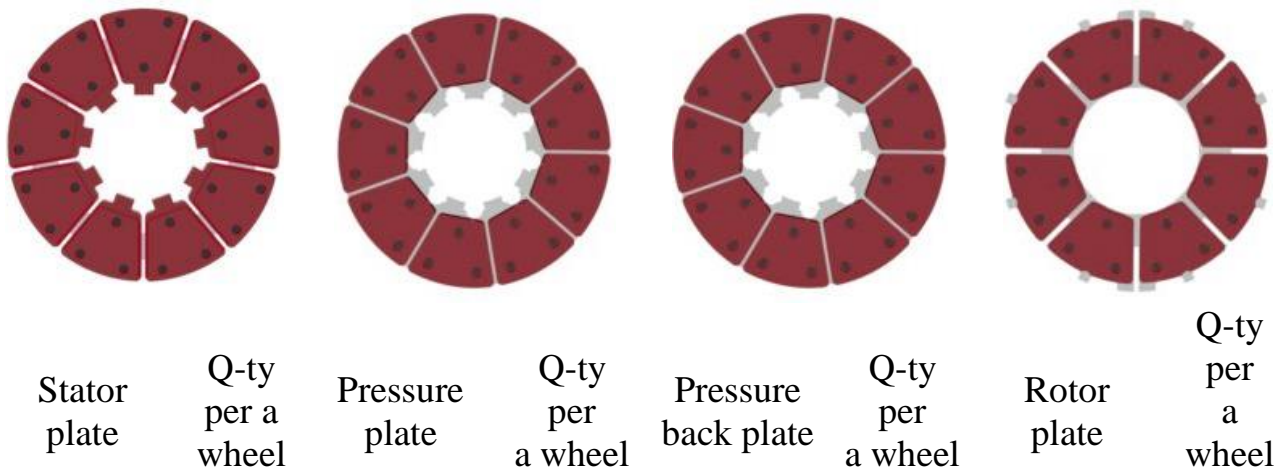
Structure and Design of the Disks that Form the Brake Unit of the Su-25 Aircraft Wheels
